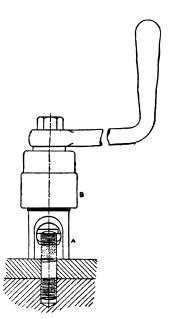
TOOL FOR ROUNDING OFF THE ENDS OF STUDS WHEN IN PLACE AND REDUCING THEM TO UNIFORM LENGTH
